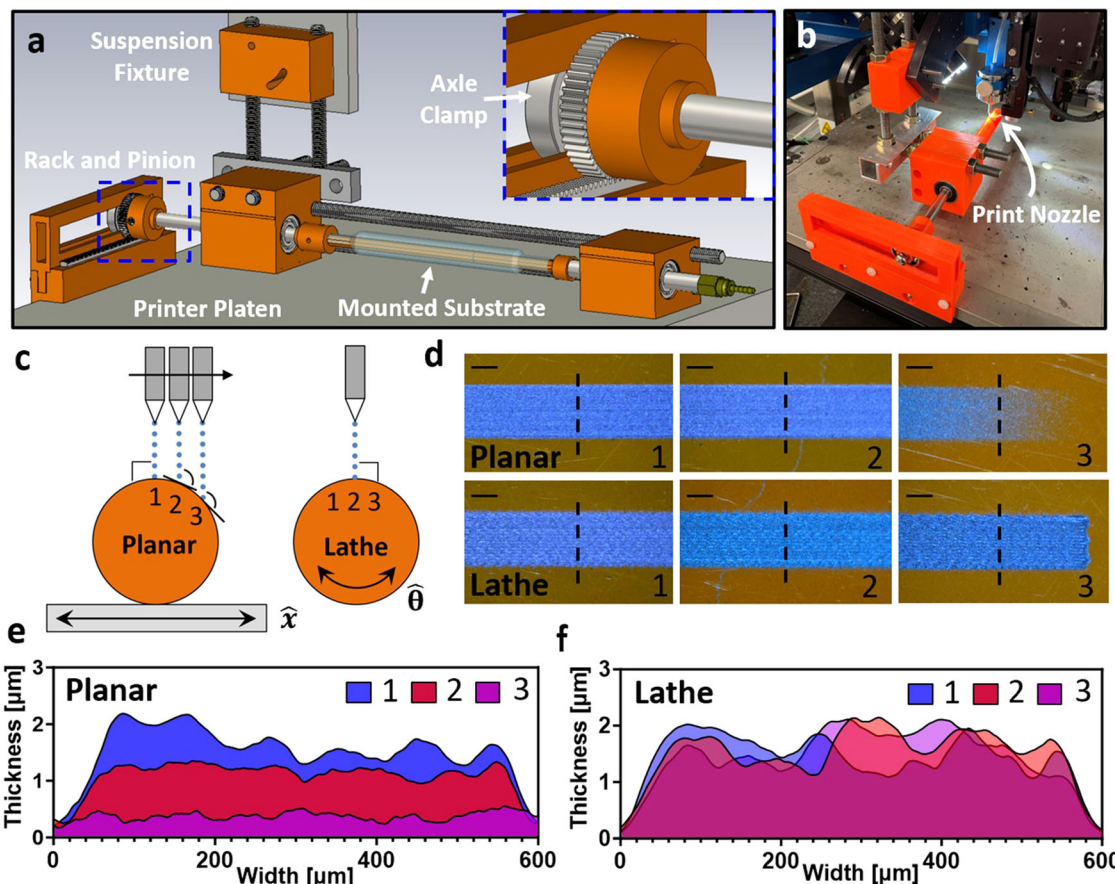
| Lathe aerosol jet (LAJ) printing mechanism and the impact of angle of print incidence on conformal films. a CAD diagram of LAJ printer attachment and closeup image of the rack and pinion with axle clamp. b Picture of LAJ printer attachment secured to the printing system with deposition nozzle located above cylindrical rotating mandrel. c Illustration of the angle of print incidence for planar (stage linear motion in x) and lathe (substrate rotational motion in θ) AJ printing. d Images of planar and LAJ printed graphene traces at positions 1, 2, and 3 separated
